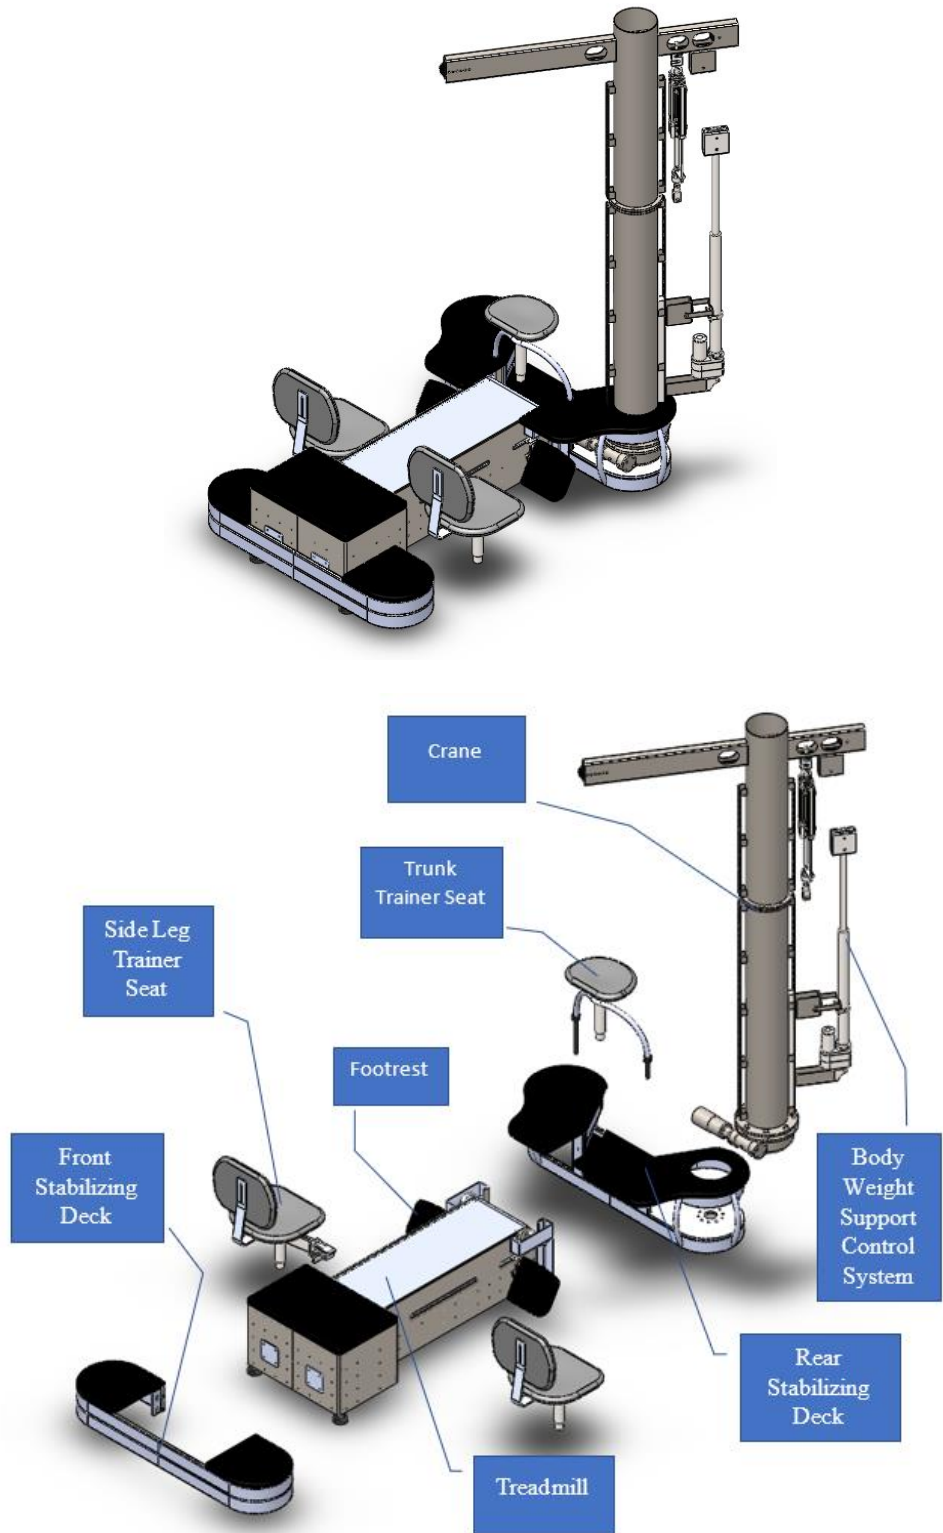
Full system (top), Full system exploded view with each sub assembly labeled (bottom)
